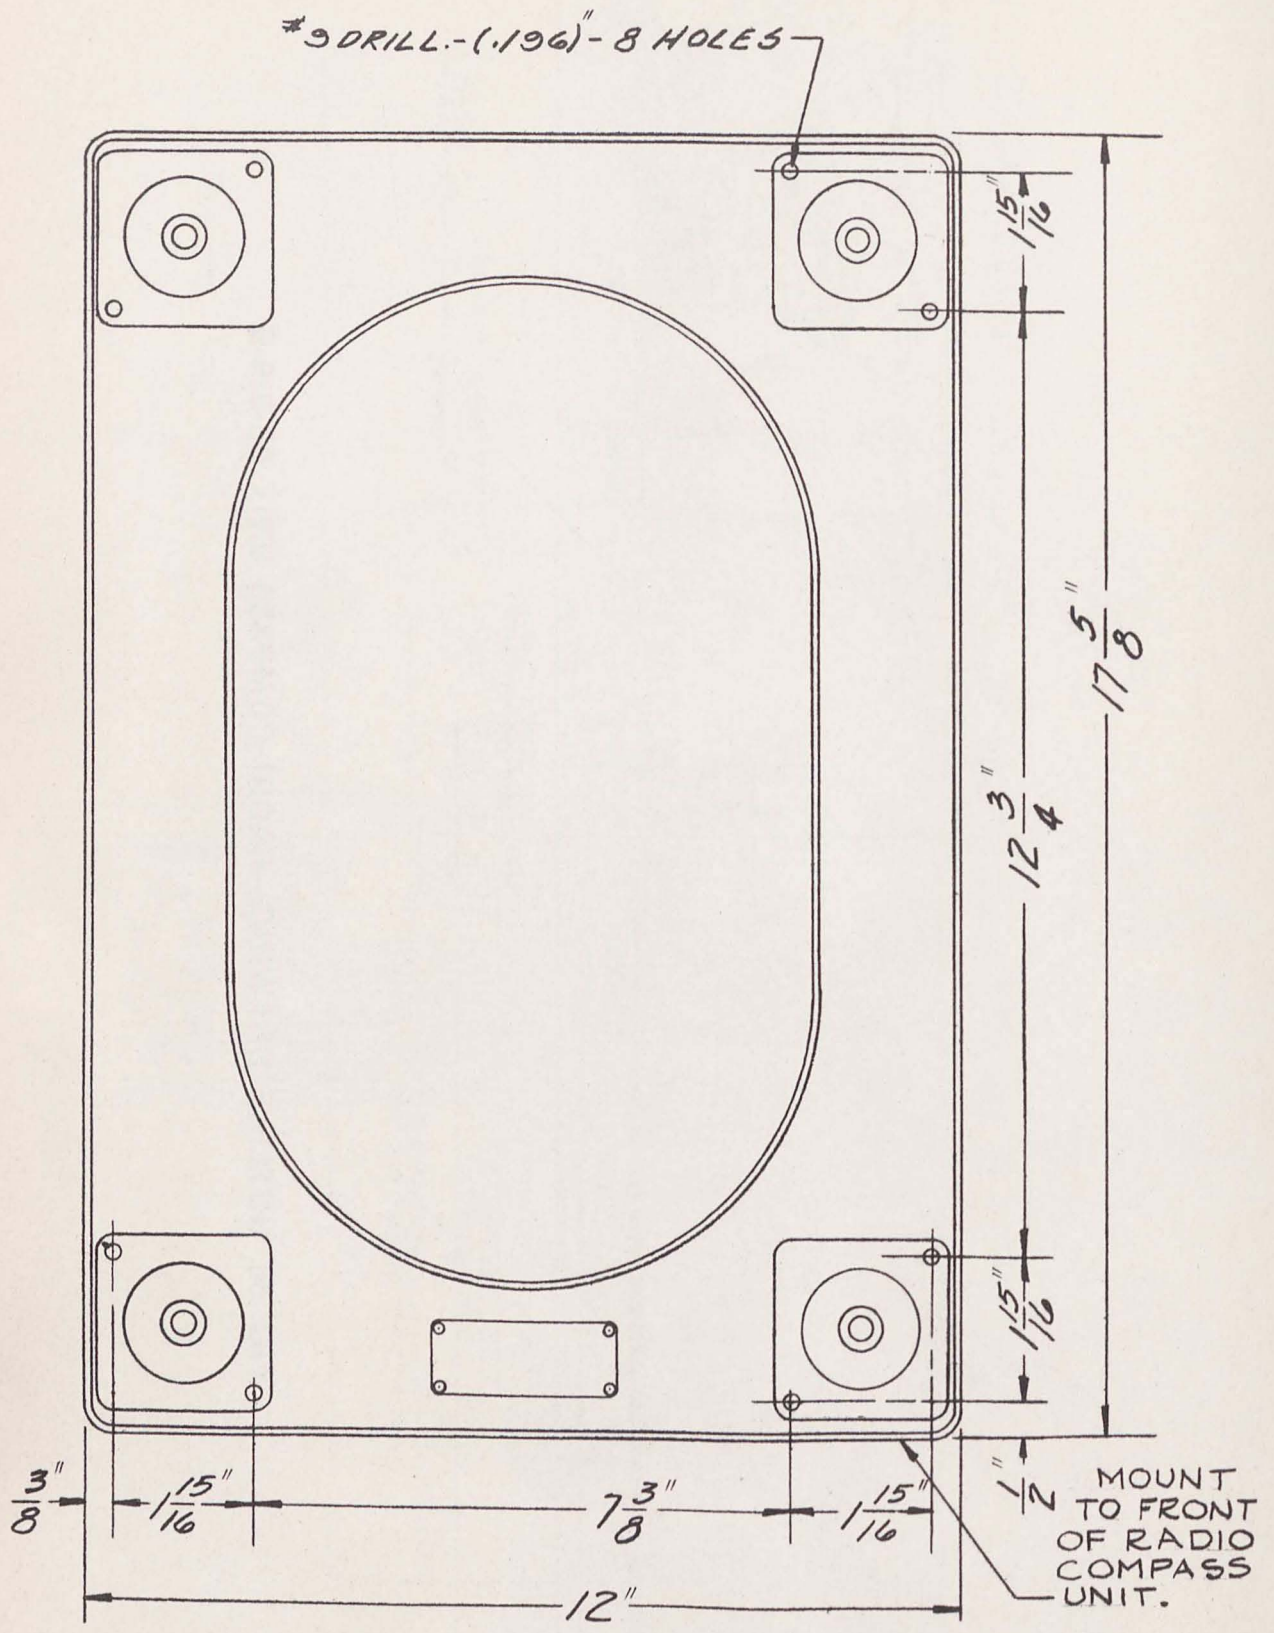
DRILLING PLAN, MOUNTING FT-145-B
